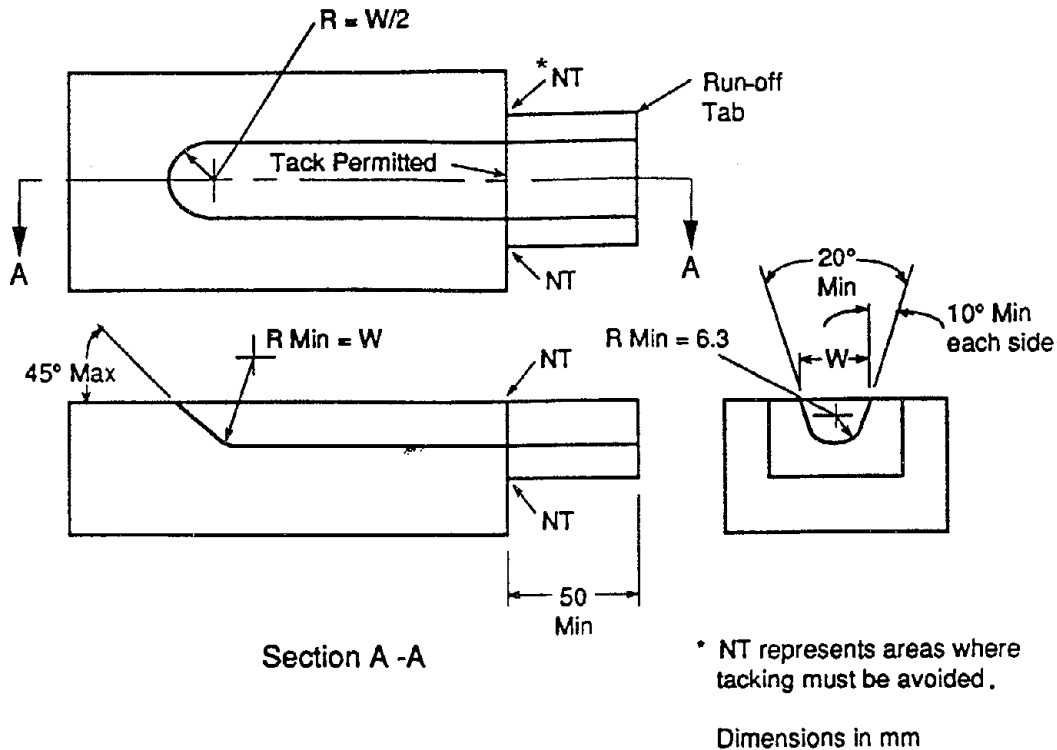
Minimum weld repair groove geometry and run-off tab requirements.
